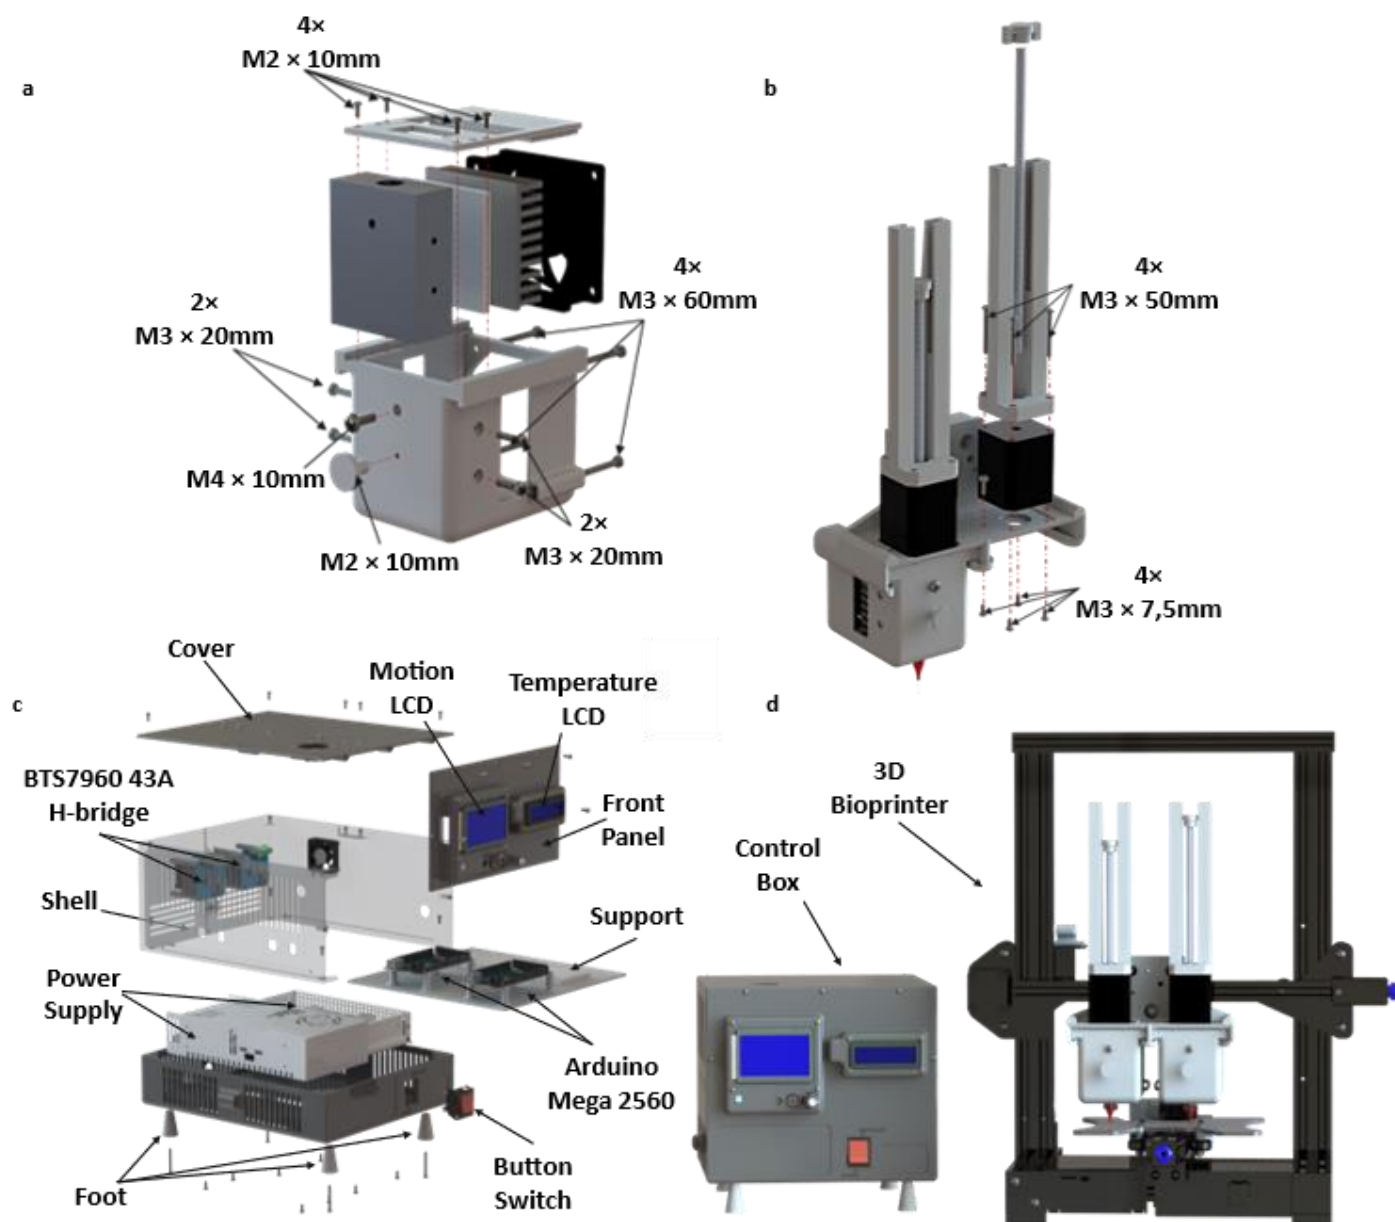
Design of the 3D extrusion bioprinter: (a) Bioprinter's extruder drawer CAD model view. (b) Syringe pump extrusion system CAD model view. As can be seen the extruder's support contains M3 holes to fix the two stepper motors and rails through which the shell rails are guided. (c) Equipment control box CAD model view. The electronic box is responsible for feeding and controlling all the physical systems of the printer and includes the circuit that regulates the power of the Peltier modules shown in Figure S4. On the other hand, as seen in the image on the left, the support contains chamfers precisely in the air outlet of the drawer cover. (d) Cad design of the prototype apparatus: the first 3D extrusion bioprinter with temperature control and UV curing, designed and fabricated at Instituto Superior Técnico, Lisbon, Portugal
